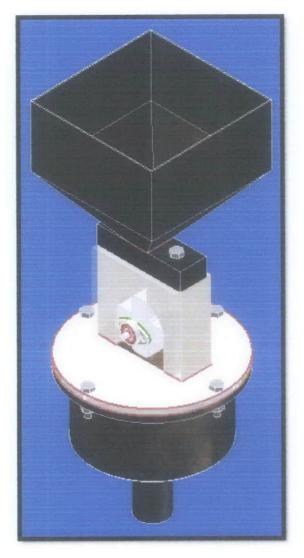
CAD Fuel Feeder with Rotary Valve
